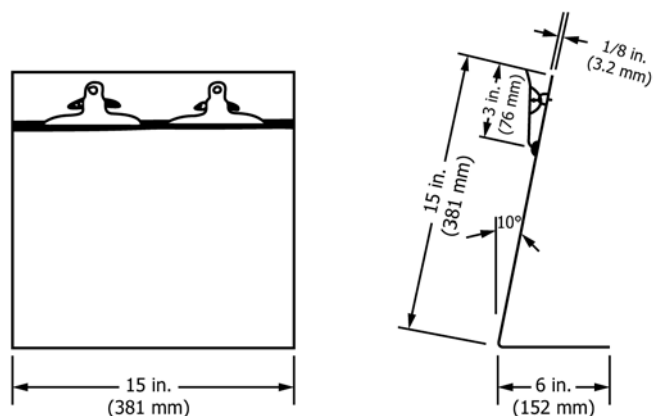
Self-Supporting Aluminum Mounting Board
